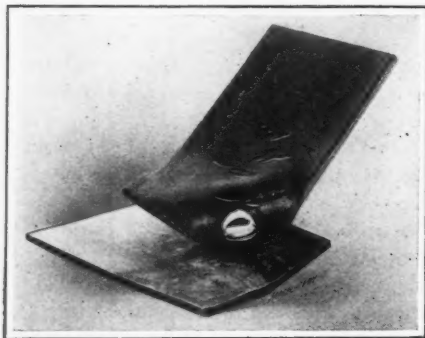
Results of an Endeavor to separate Two Pieces of Sheet Steel that have been spot-welded—Note how Metal around Welded Spot is tearing away and Welded Spot remains intact, forming one Sheet with the Lower Piece
